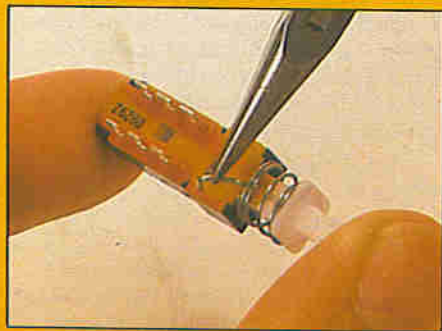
Remove the retaining clip keeping the spring-loaded plunger pushed in.
